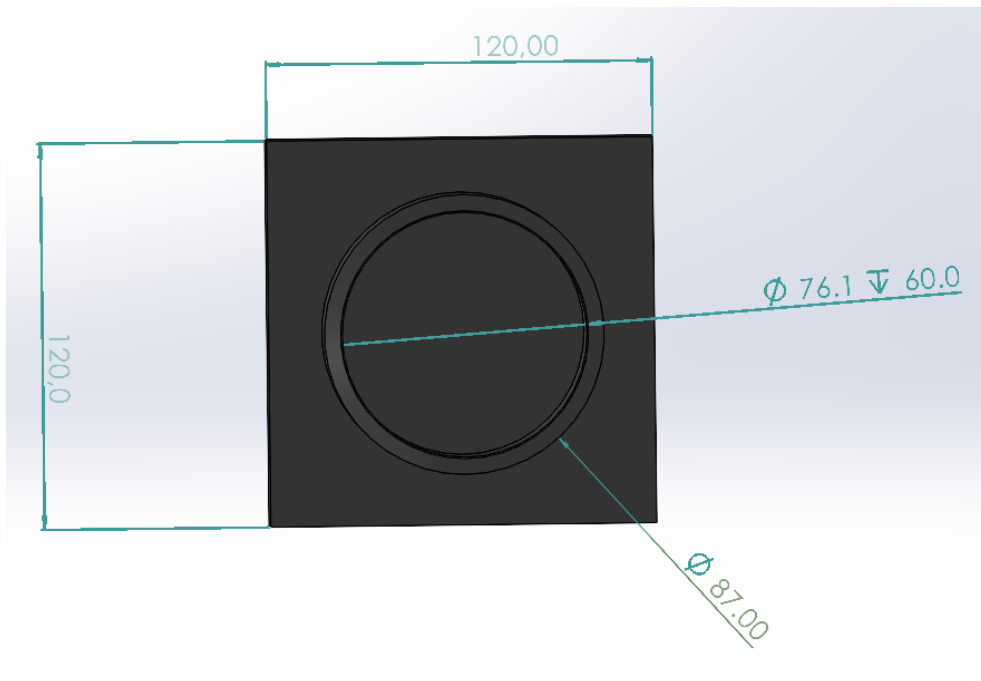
Dimensions in mm for the POM casting on top of the steel tube, seen from the bottom.
